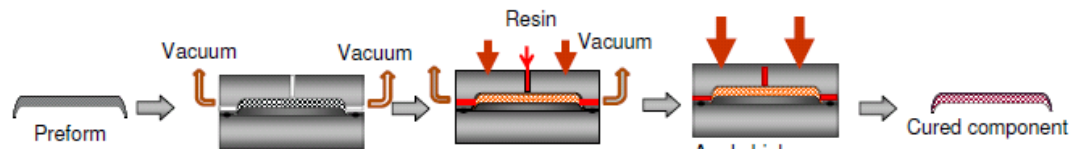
RTM moulding process: placing preform into a mould; applying optional vacuum after mould closure; injecting pre-mixed resin into the mould; component is cured in the mould before demoulding
